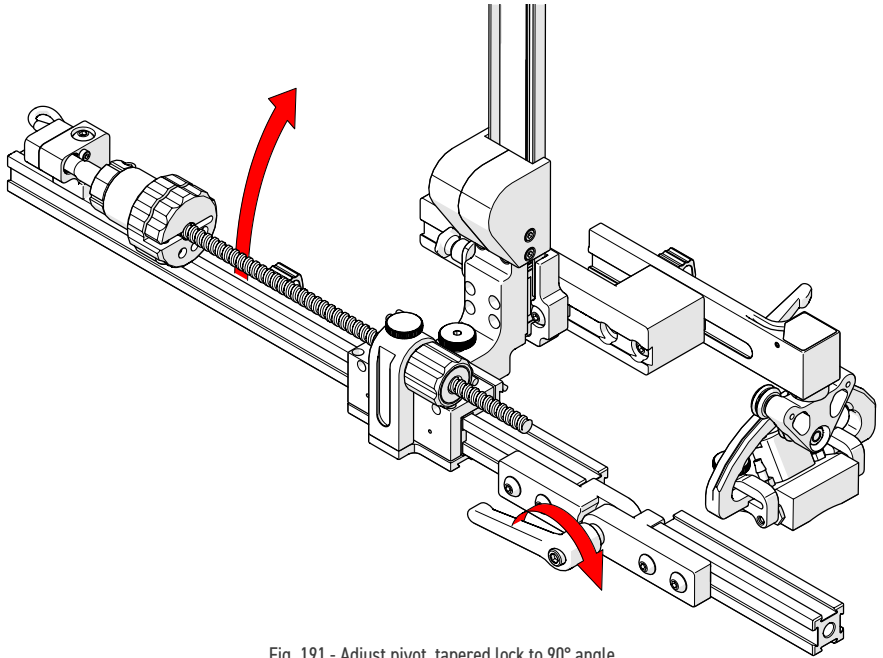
Adjust pivot, tapered lock to 90° angle
